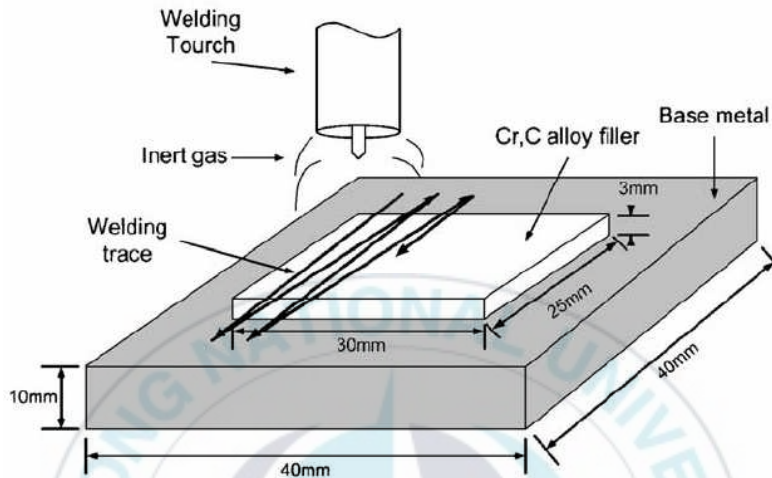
The schematic diagram of the hardfacing welding
